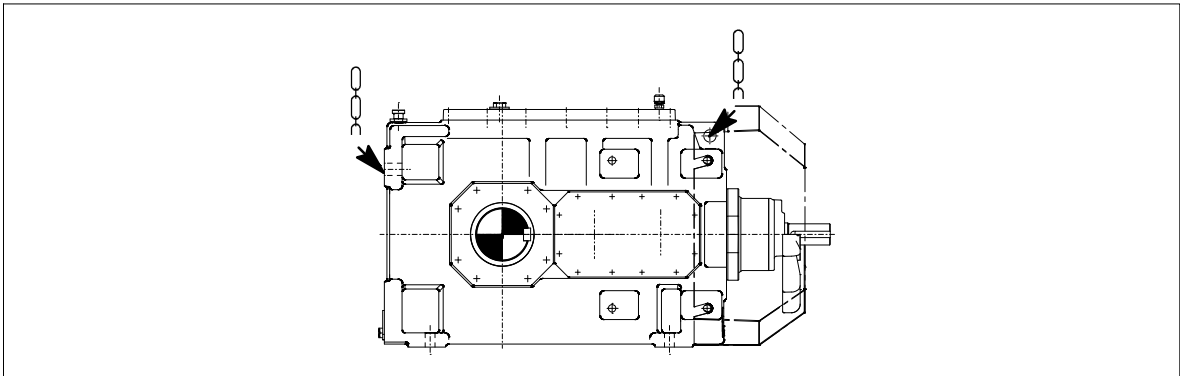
Attachment points on gear units of type B3.. up to size 512
